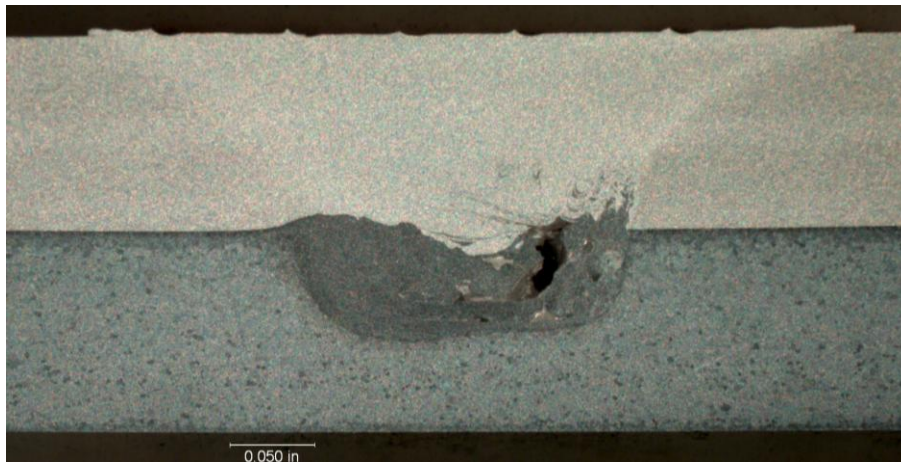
Weld macro of aluminum alloys 6082-T6 and 6063-T6 with wormhole and several small voids (lap weld configuration) [13].
